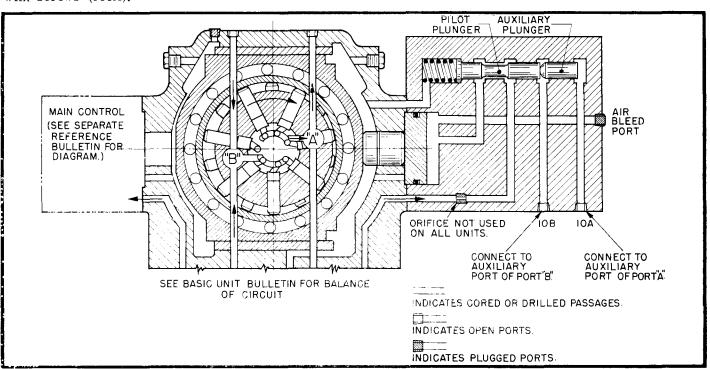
Schematic Diagram, Type "C" Opposing Operator (5V-10119-L).
